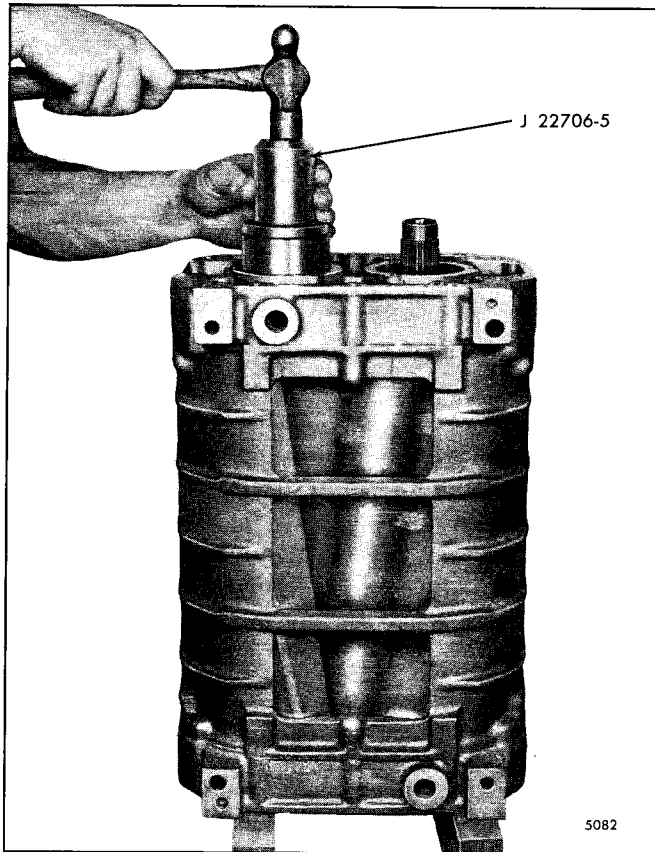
Installing Ball Bearings on Rotor Shafts and in Rear End Plate using Tool J 22706-5
